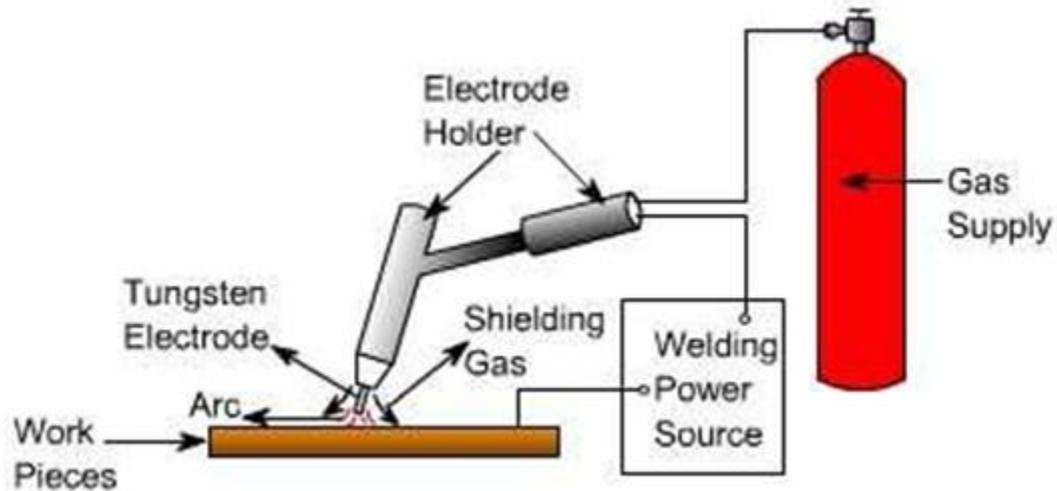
Schematic Diagram of TIG Welding System. [Ref:1]
